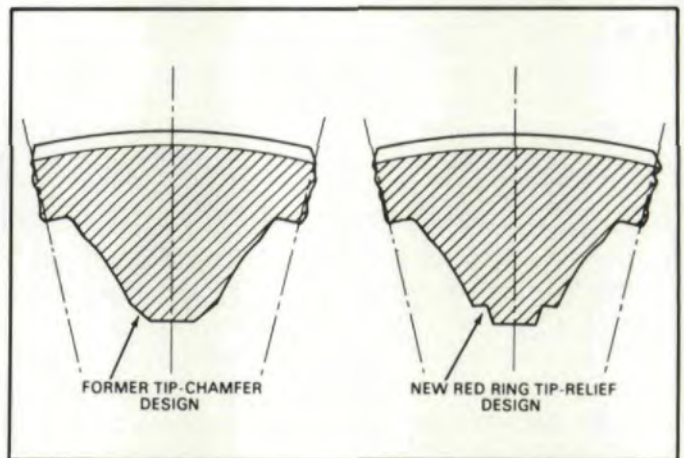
Conventional broached internal gear tip chamfer and improved tip relief, length-of-roll-control design.
